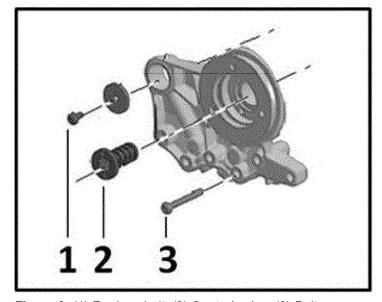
(1) Replace bolt. (2) Control valve. (3) Bolt.
